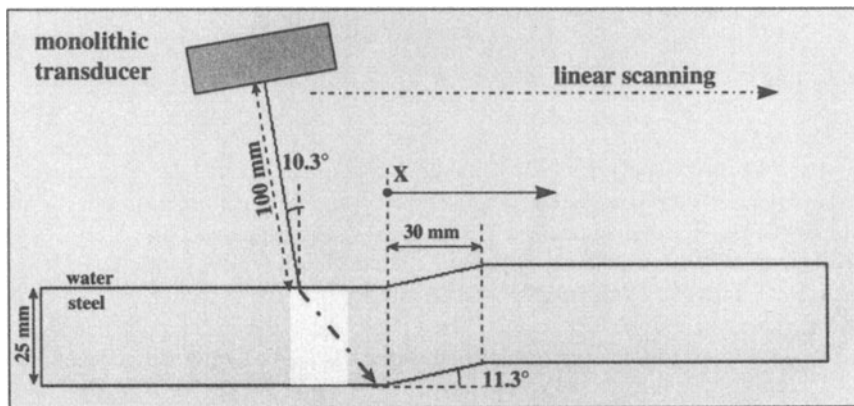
Inspection configuration of a misaligned specimen using a linear scanning system.
